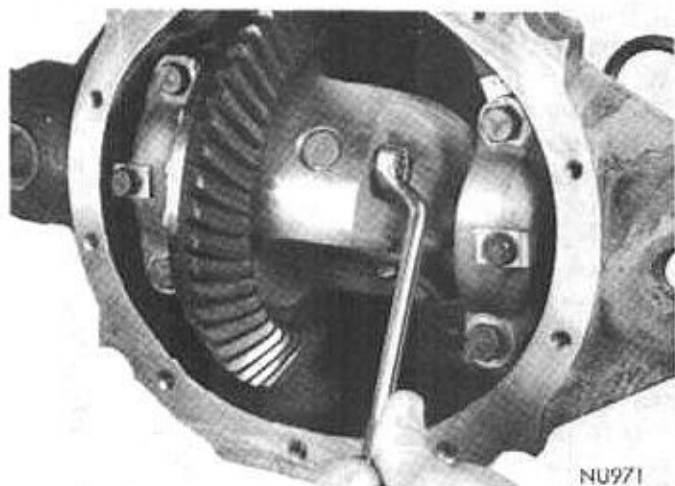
Removal or Installation of Differential Pinion Shaft Lock Screw
